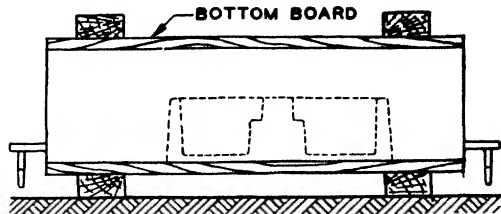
DRAG RAMMED AND BOTTOM BOARD IN POSITION
